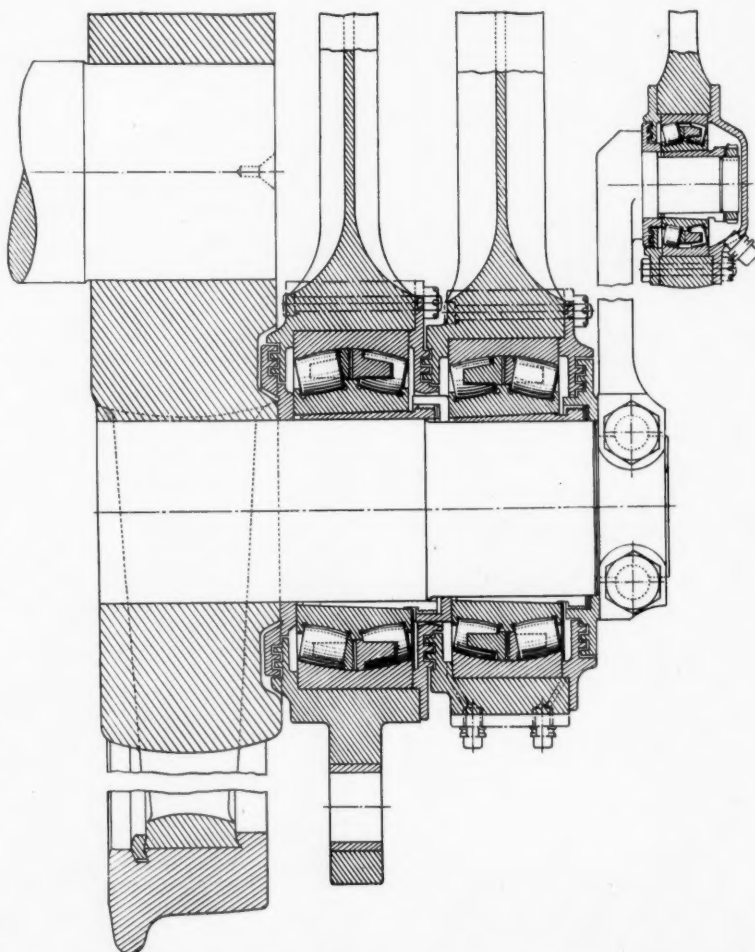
Arrangement of big-ends and eccentric rod fitted with roller bearings, SKF
